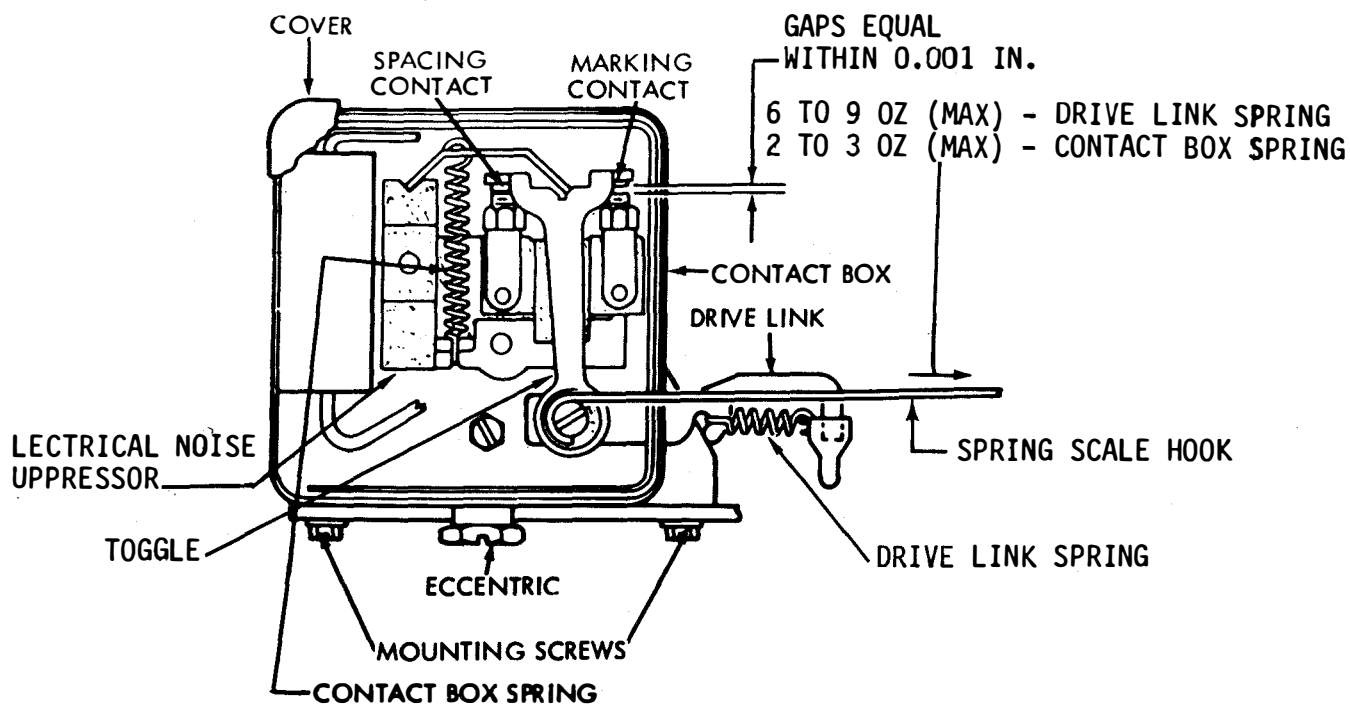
Signal Contact Clearance, Contact Drive Link Spring and Contact Spring
